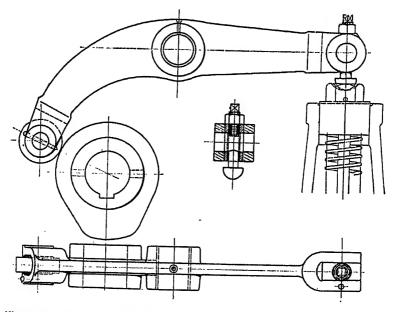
Valve Actuating Gear of a Sulzer Two-cycle Engine with Four Scavenging Valves in Cylinder Head.
